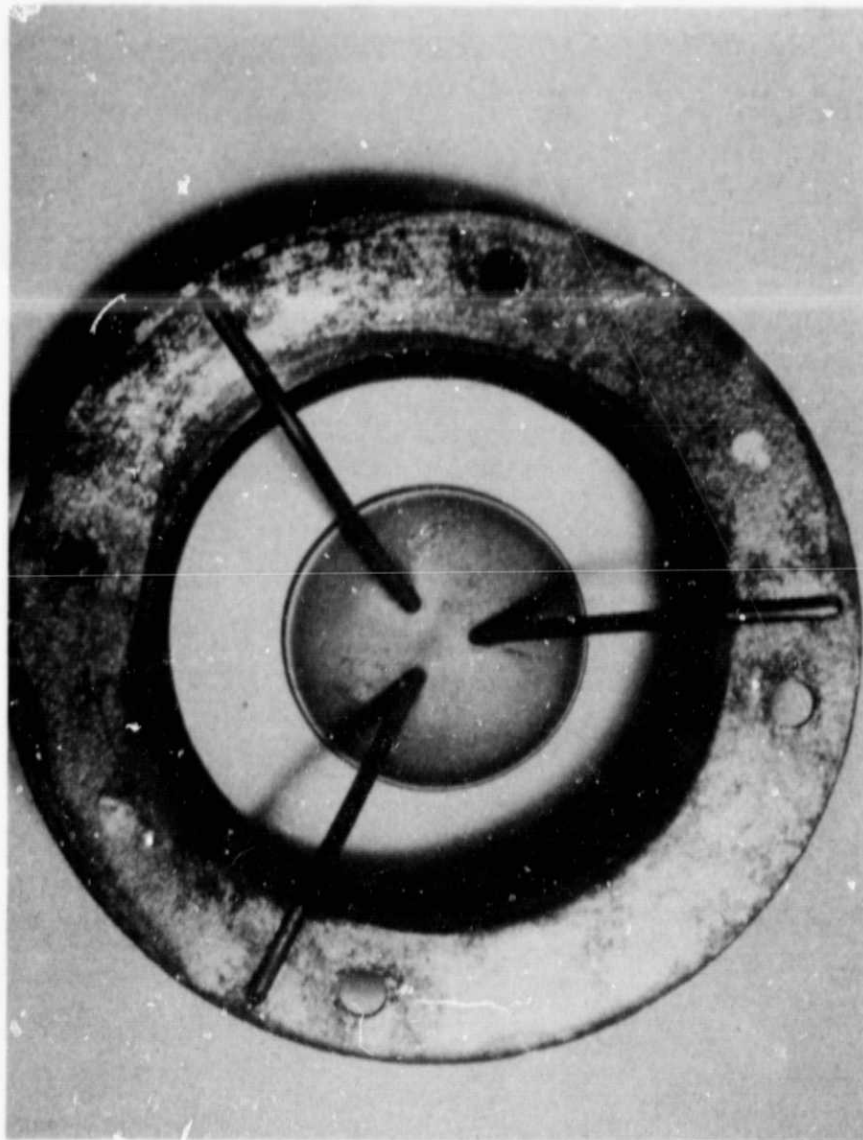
Post-test appearance of upstream side of baffle assembly.
